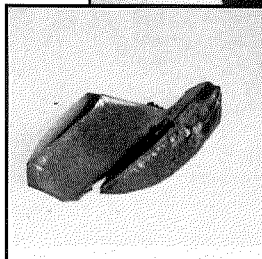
(left) : Broken teeth also showing the crystalline fracture surfaces
